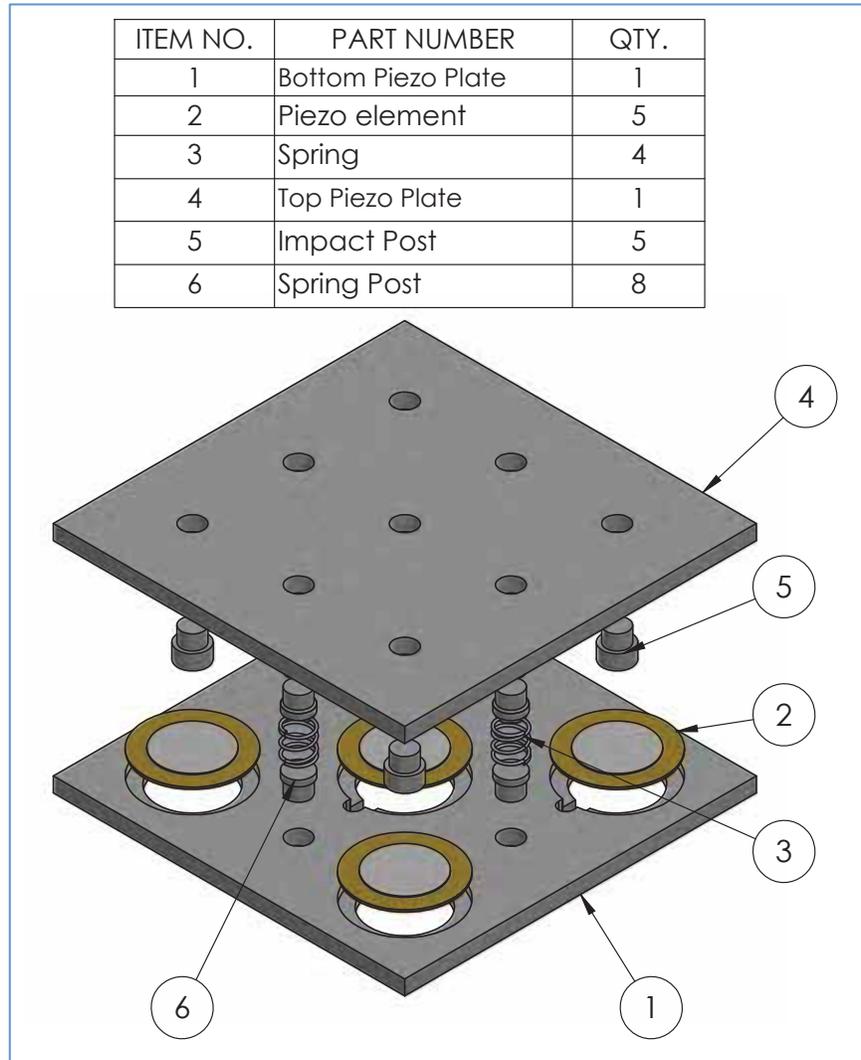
Exploded view of the final PECS 3in. by 3in. plate prototype.
